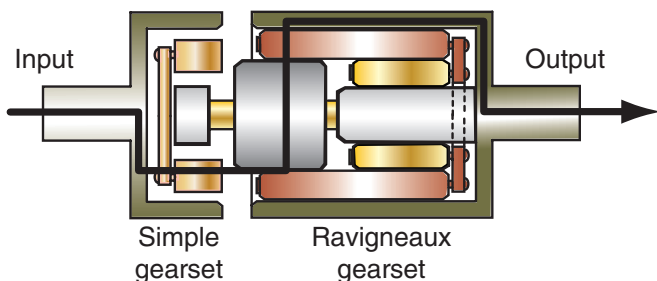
Power flow in fourth gear for a typical Lepelletier gearset.
